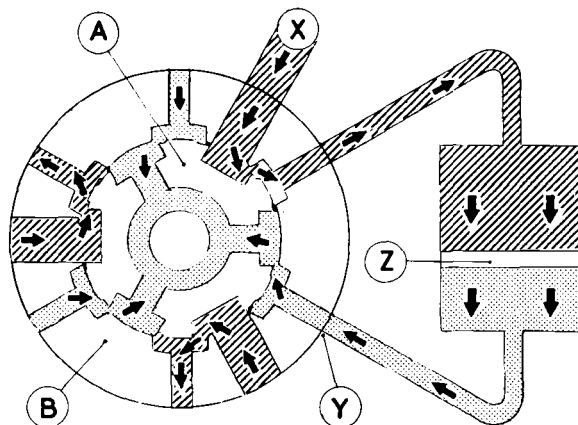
Operating diagram of the rotor valve (steering turned) A Rotor B Sleeve X Pump pressure Y Reservoir pressure Z Pressure displacement.
